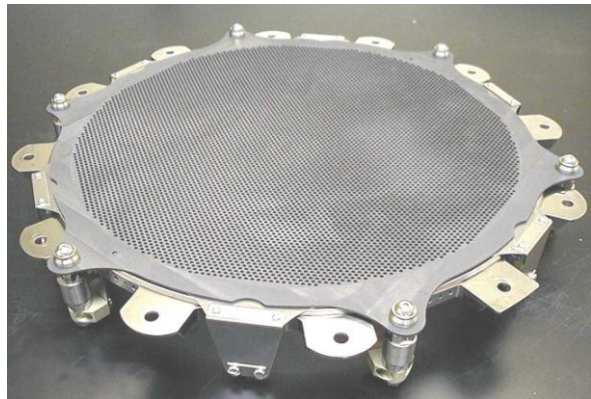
Photograph showing Accel Grid mounted to the Grid Assembly
